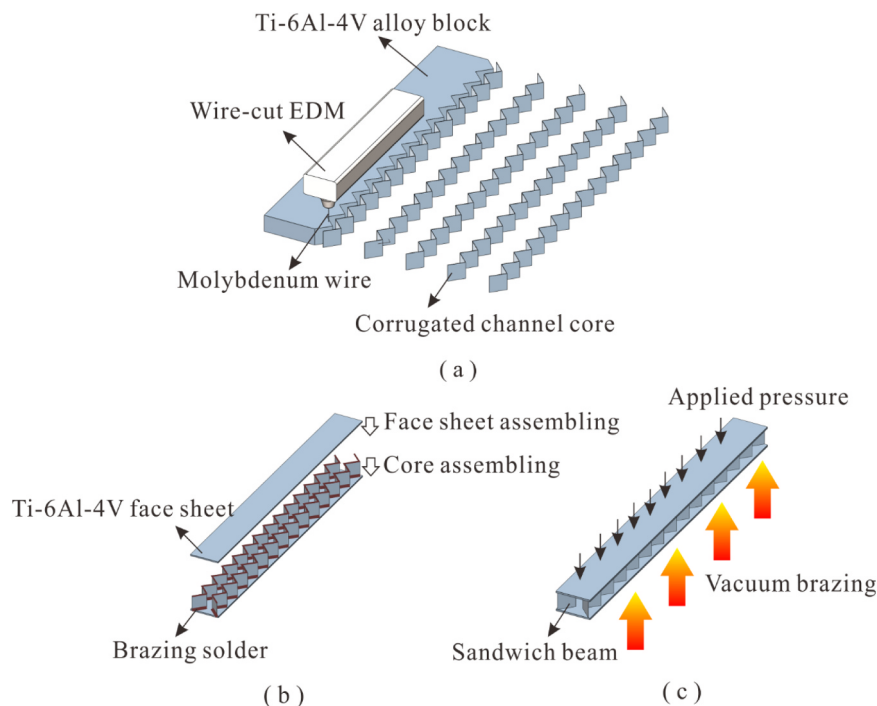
Fabrication of sandwich beam with triangular corrugated channel core: (a) cutting the core; (b) assembling the sandwich beam; (c) vacuum brazing.
